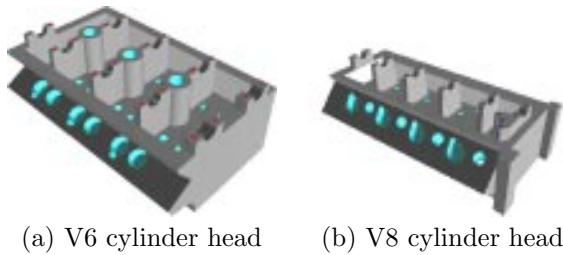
Two sample parts. The operation to be performed is to drill the positioning holes for the cam tower caps. On the V8 engine, there are two such positioning holes located in a line. On the V6 engine, there are eight holes in an array.
